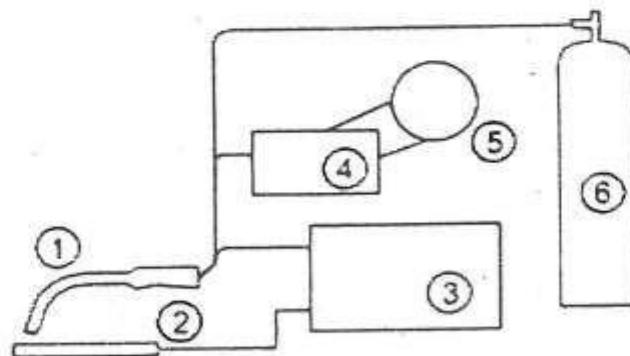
GMAW circuit diagram (1) Welding torch, (2) Work piece, (3) Power source, (4) Wire feed unit, (5) Electrode source, (6) Shielding gas supply.
